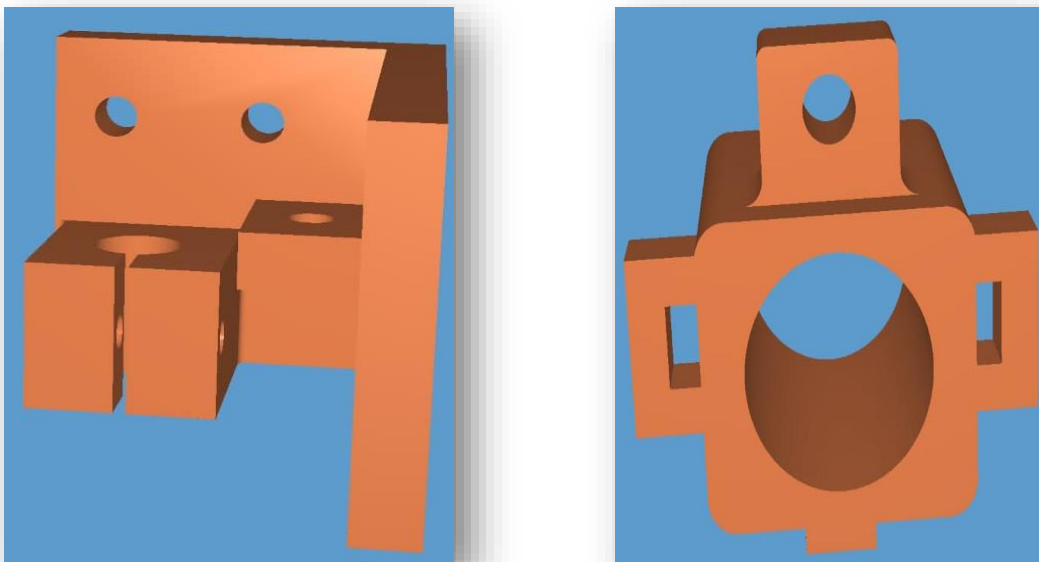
CADD diagrams of 3D Printed parts used in making of Two – Axis Computer Numerical Controlled Foam Cutting Machine
